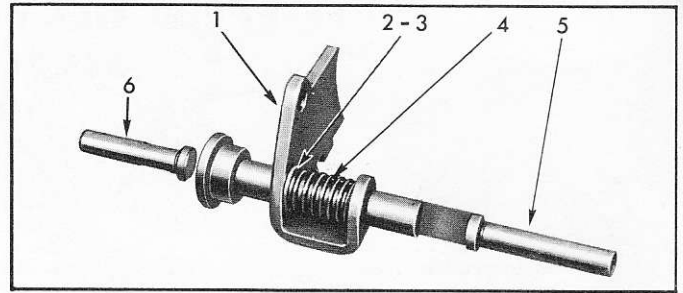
B—Shift Rail, Plunger, Fork and Spring Assembly
